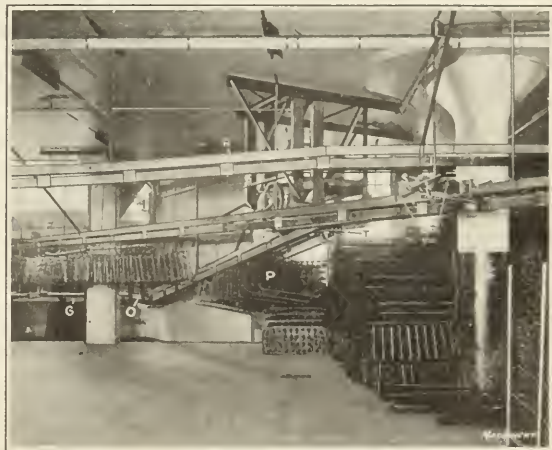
Means of elevating Springs from Track Level G to Upper Level F
